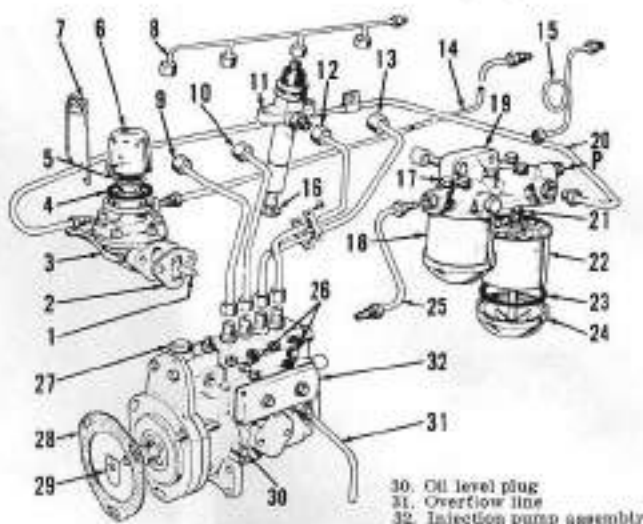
Drawing showing lay-out of model 1200 fuel system, showing complete pressurized filter unit. At tractor serial No. 705005, plug (P) was deleted from filter base and a bleed line similar to that shown for model 990 in Fig. 53 was fitted. The new bleed lines may be installed on earlier tractors. Fuel lift pump is on right side of engine; filters and injection pump are located on left side. Injection pump cambox lubricant should be changed at regular intervals; refer to paragraph 97.
